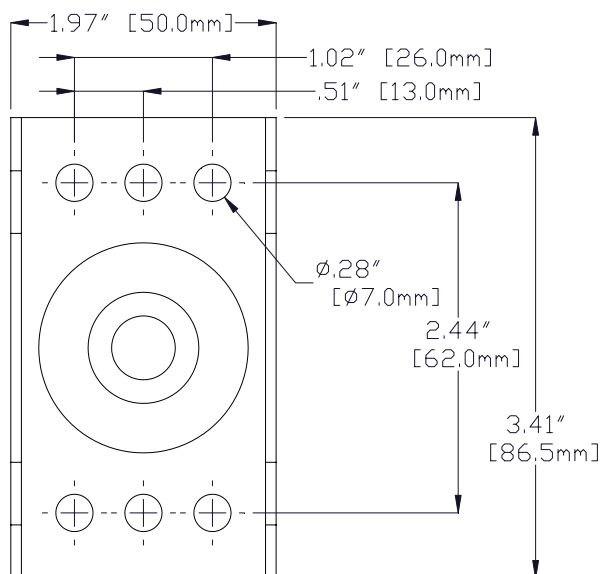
Yoke Mounting Plate Dimensions (All Models)
